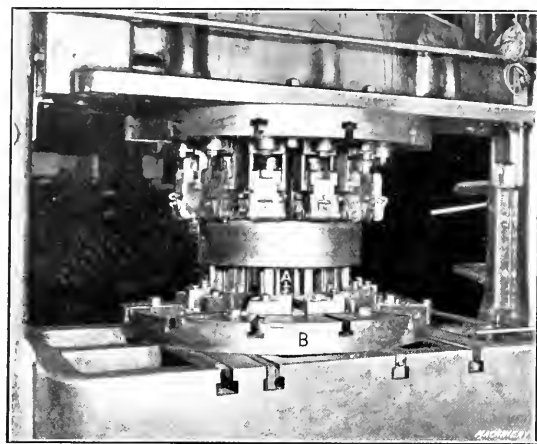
Press and Dies for piercing Rivet Holes in Central Flange of Rim Section
